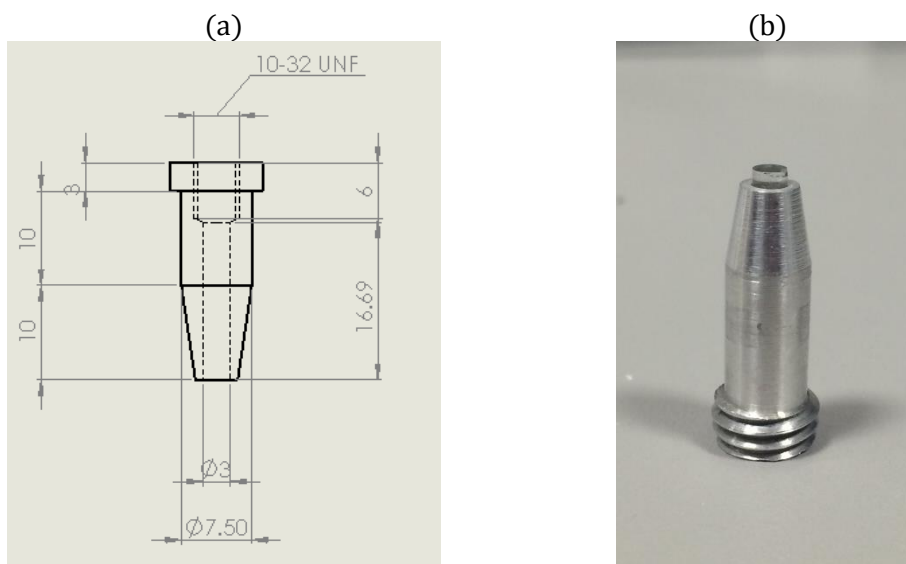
Aluminium Sleeve for liquid jet. (a) Mechanical drawing of the sleeve with physical part shown in image (b)
